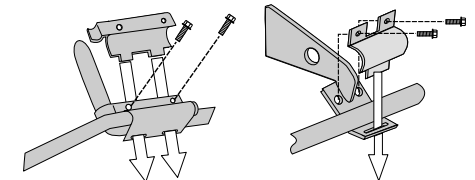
HANDLE AND LIFT HOOK ASSEMBLY
